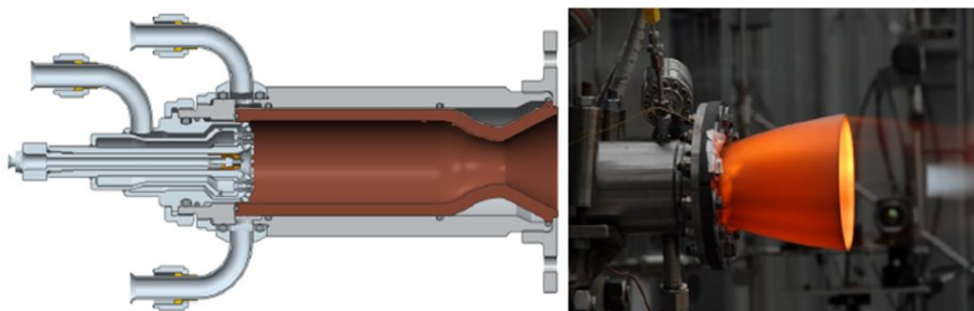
Cross-section of 1.2K lbf chamber / injector and hot fire test with carbon composite nozzle [14].
